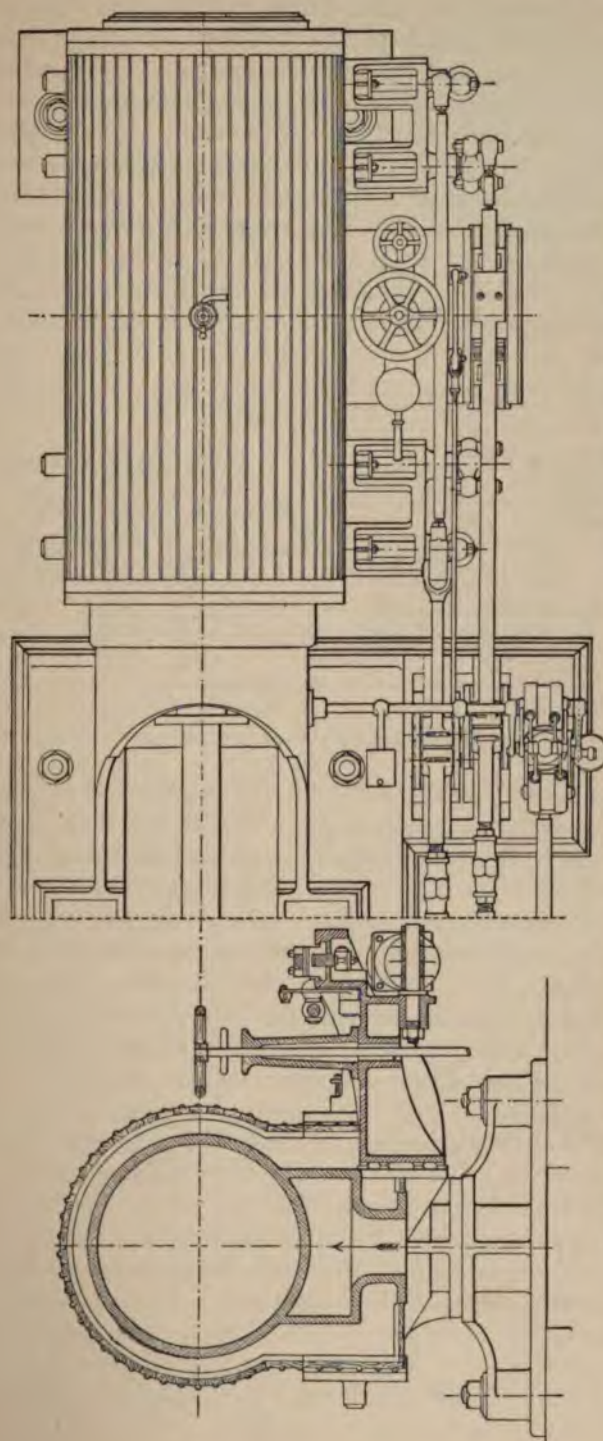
J. & E. Wood: Automatic Slip-motion, for Horizontal Cylinder having Corliss Valves. Cross Section and Plan. Scale 1/8th.
